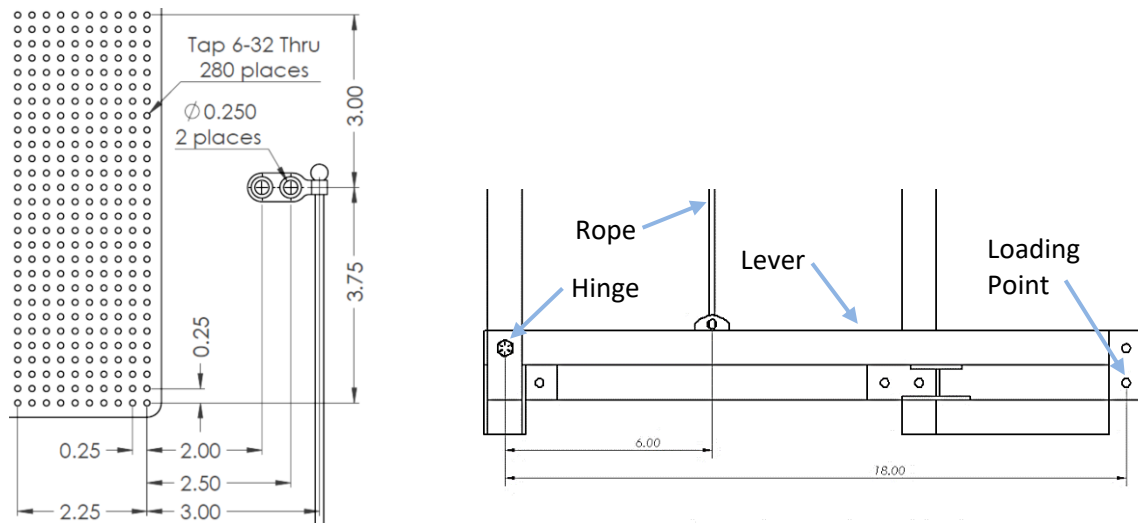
Schematics of the support plate, loading component and lever. *Left Panel:* Your part will be mounted to the support plate via (a) peg(s) and to the cylindrical features on the loading component. Support pegs can be attached to the support plate via a screw at any of the indicated locations, which are on a quarter-inch grid. Support pegs stick out from the indicated tapped holes, so there is no interference with your part in areas where you choose not to include a peg. The loading component will have two 0.250 inch cylindrical attachment pegs. The loading component must be located and oriented exactly as dimensioned in the drawing. *Right Panel:* The other end of the rope will attach to a lever at the indicated location, directly below the loading component. The lever will be hinged at left. On the right end of the lever, weights will be hung at the indicated location. During loading, nothing else can contact the lever. A SolidWorks assembly of the full rig is provided for verification of your parts in the detailed design phase.
